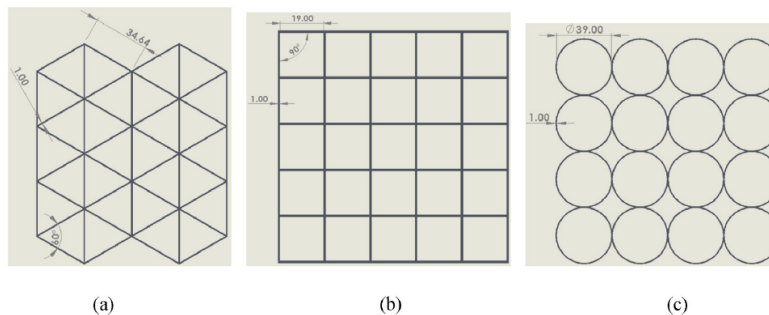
Typical planar (a) triangular, (b) squared, and (c) circular polygon shell structures
